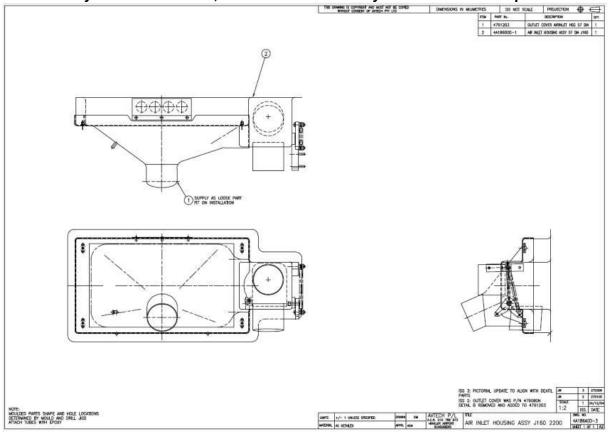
Typical Carburettor Heat Box (all J-Series)
